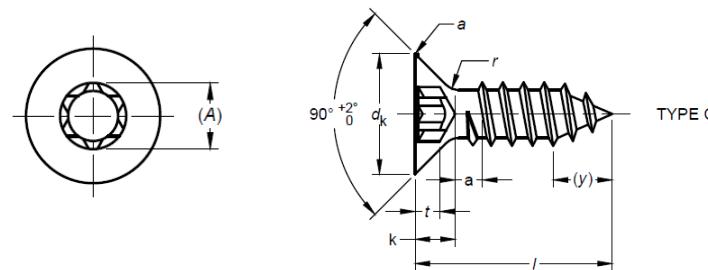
(B) COUNTERSUNK HEAD (TYPE C END)
